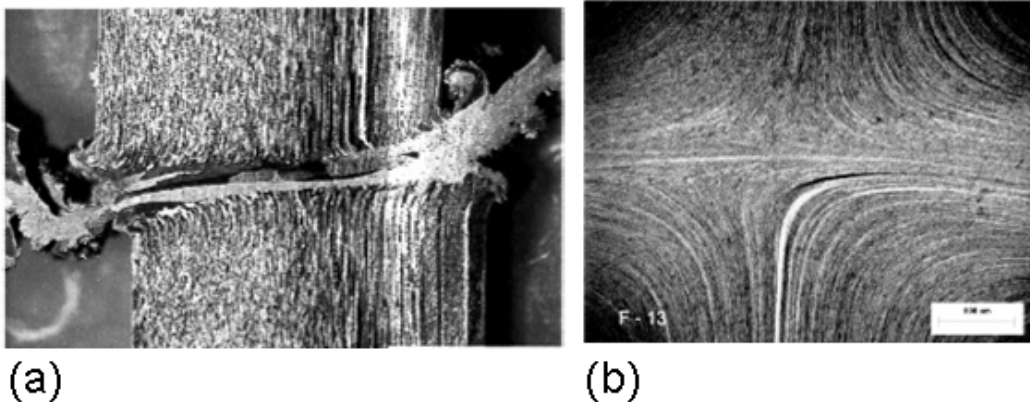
Cross section of MA956 joined to itself using flash butt welding (a) macro image of a typical weld; (b) microstructure of a weld made using increased flashing acceleration and reduced upset current.³⁰
